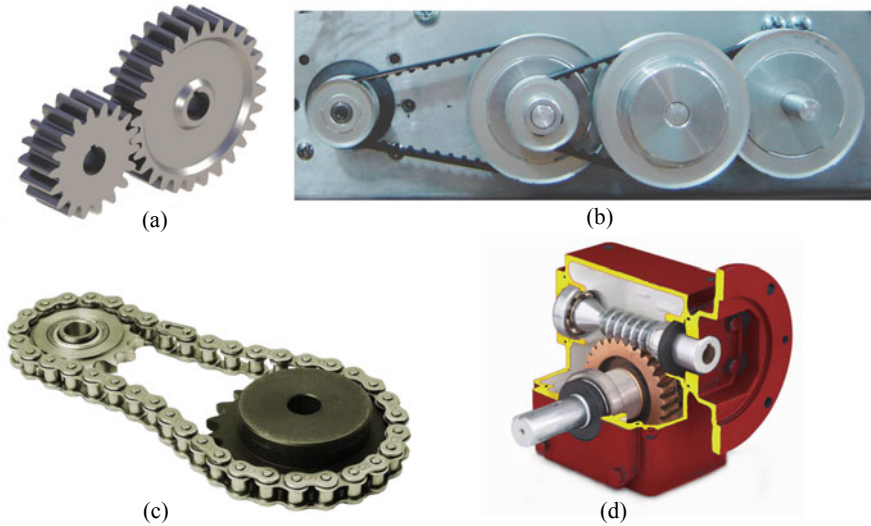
Examples of drive mechanisms typically employed in robotics: a spur gears, b timing pulleys and belt, c sprocket and chain and d worm gear
